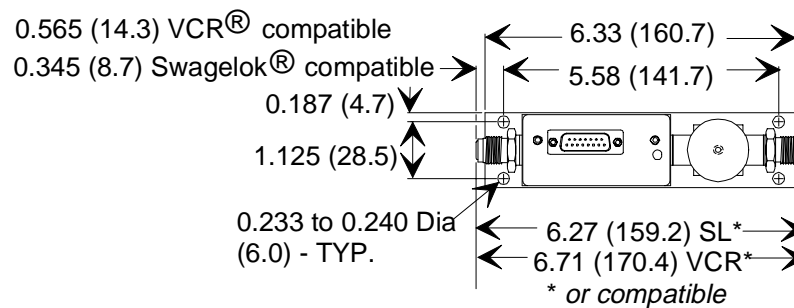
Mounting Dimensions of the Type 2479 Flow Controller
